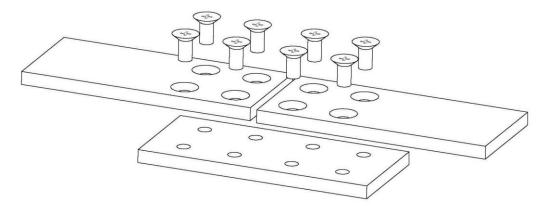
EXPLODED VIEW OF TEST VEHICLE
